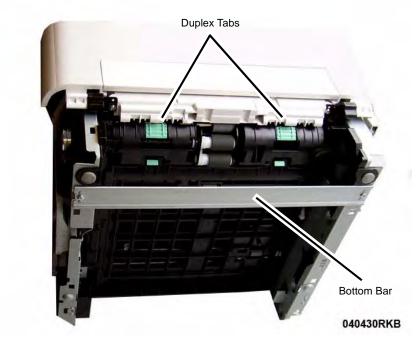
Bottom Bar and Duplex Assembly (Bottom View)
